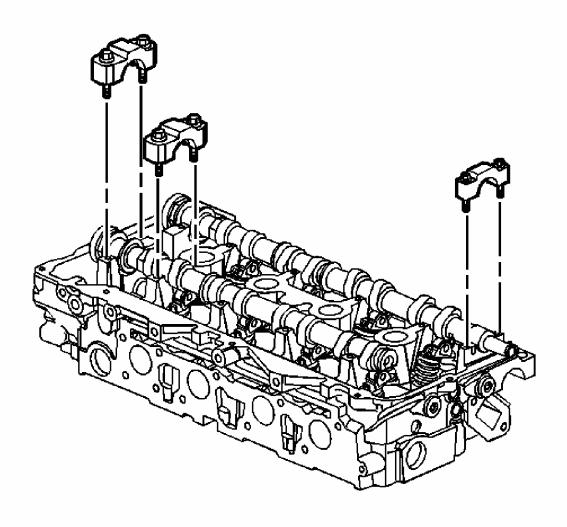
View of Camshaft Bearing Caps Courtesy of GENERAL MOTORS CORP.
